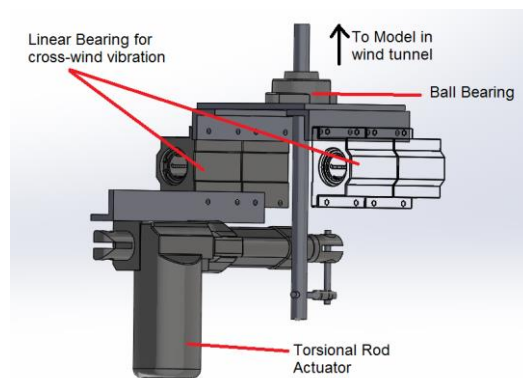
SolidWorks design interior torsional system mounted on linear bearing for cross-wind vibration
